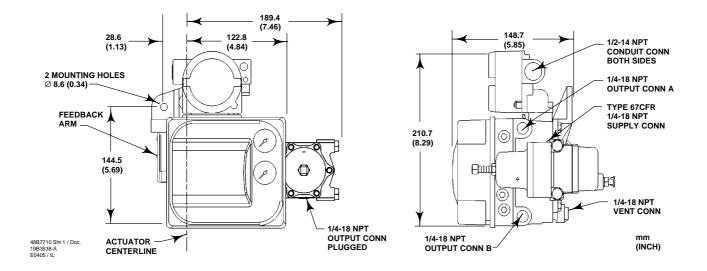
Dimensions for Type DVC6010 Digital Valve Controller with Integrally Mounted Filter Regulator
